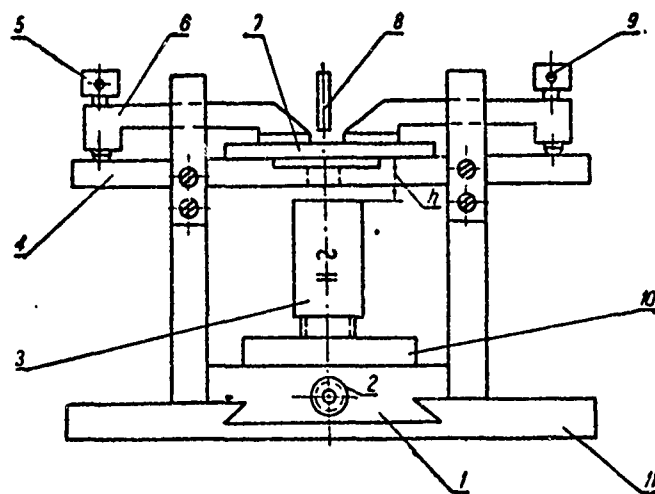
Welding attachment; 1 - moving carriage; 2 - electric motor; 3 - electromagnetic coil; 4 - plate; 5, 6, and 9 - clamping device; 7 - weld specimen; 8 - electrode; 10 - lifting mechanism; 11 - base.
